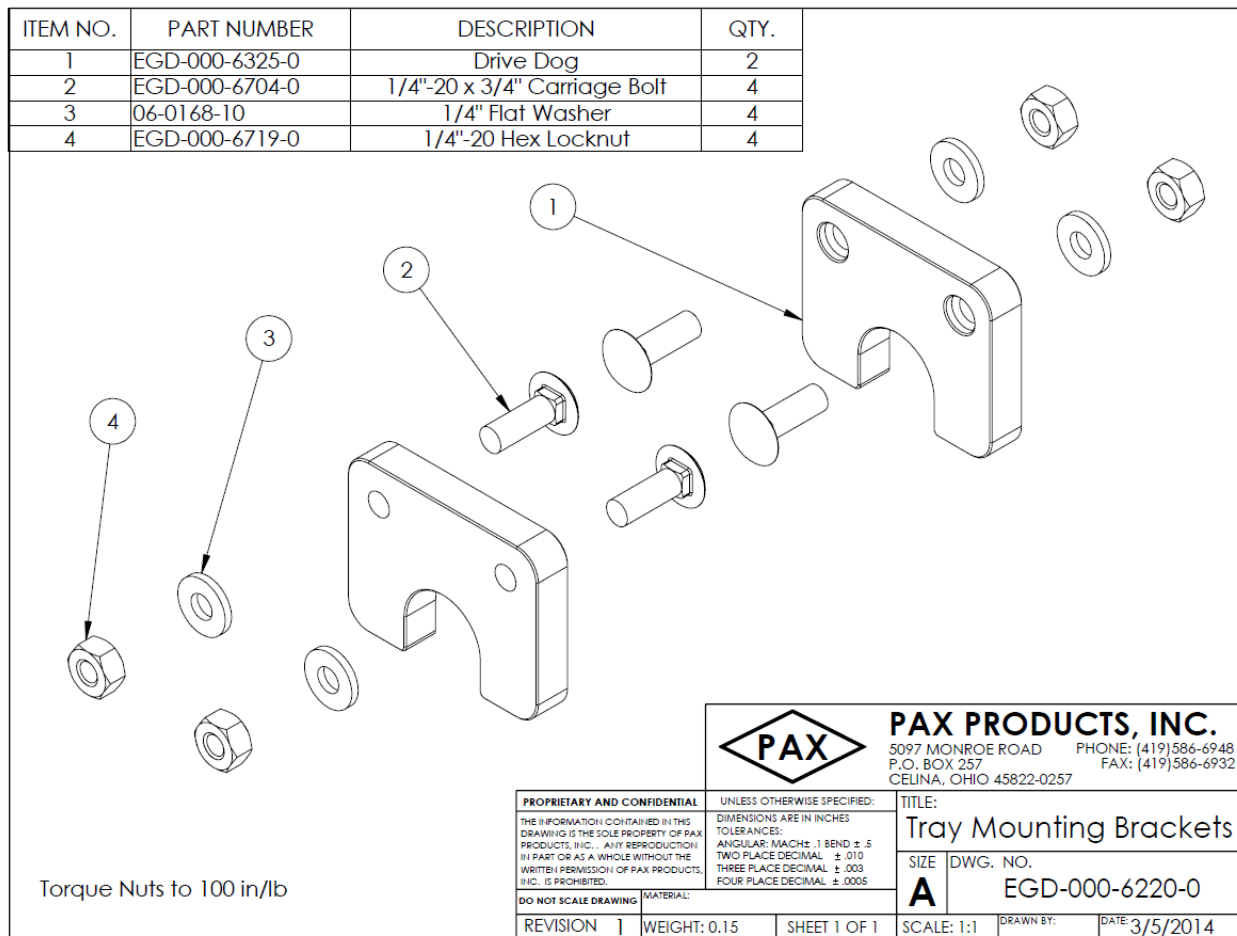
EGD-000-6220-0 TRAY MOUNTING BRACKETS
